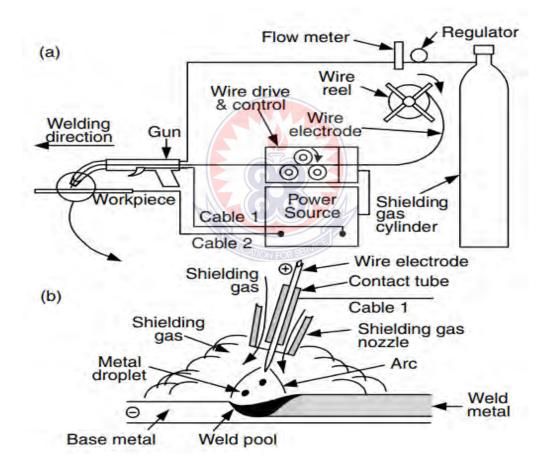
Gas-metal arc welding: (a) overall process; (b) welding area enlarged.
